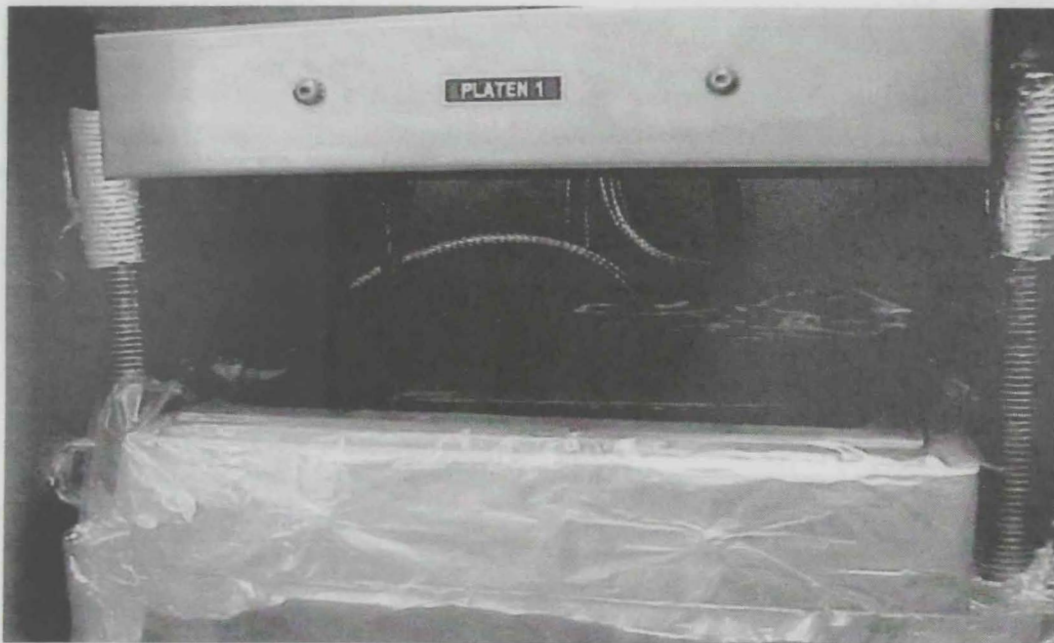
The mold cavity opened containing the sample after hot pressing
